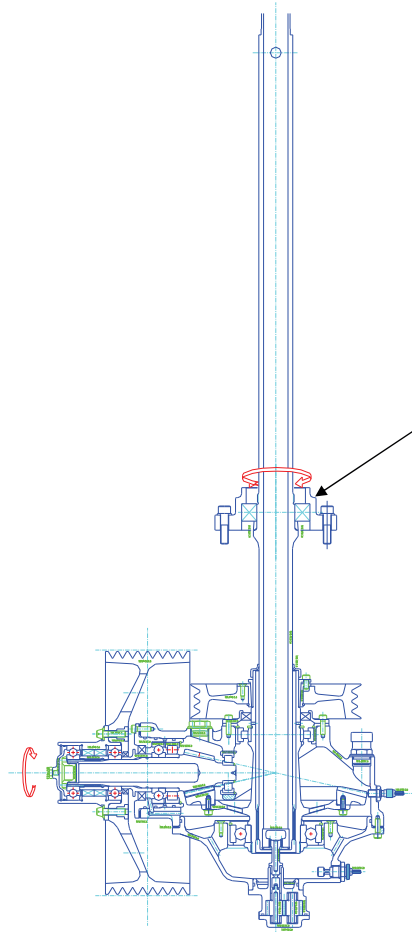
Main rotor bearing support (P/N E1.63.057.201)
